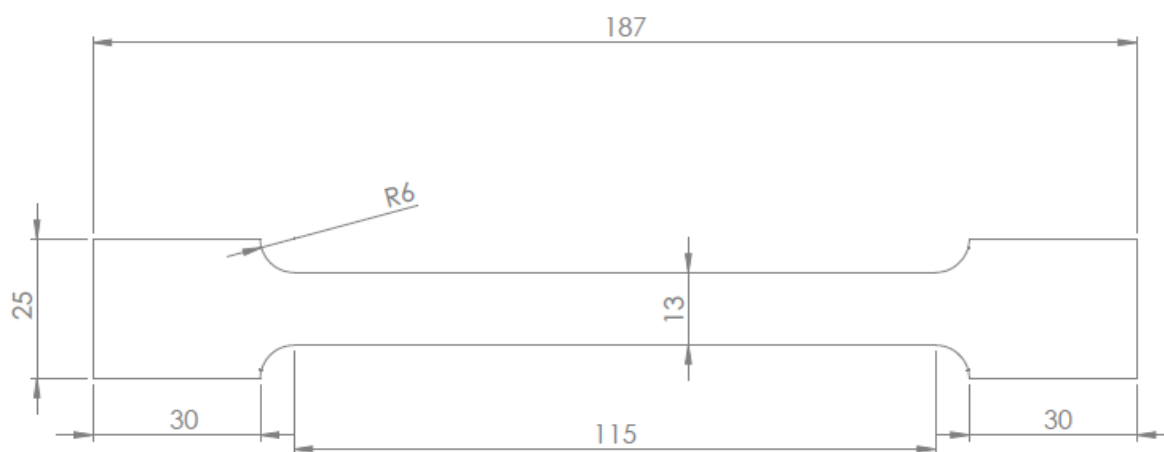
Design drawing of dogbone specimen. All dimensions in mm.
